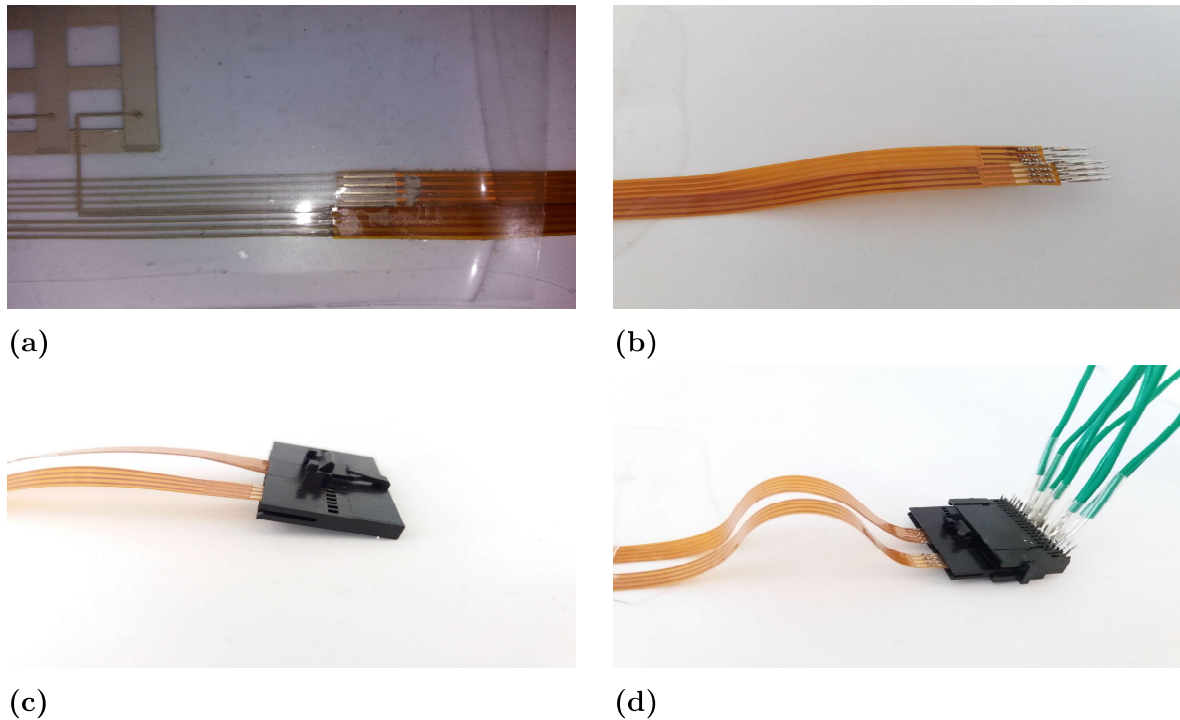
a) Direct AgPDMS to flex PCB interfacing method. b) Metal crimps used to interface flex PCB and rigid connector. c) Flex PCB inserted into rigid connector. d) Wires soldered to connector pins.
